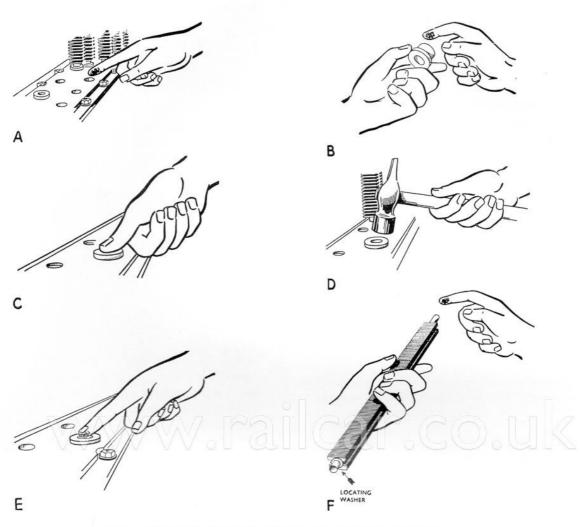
METHOD OF FITTING RUBBER FERRULES IN RADIATOR
